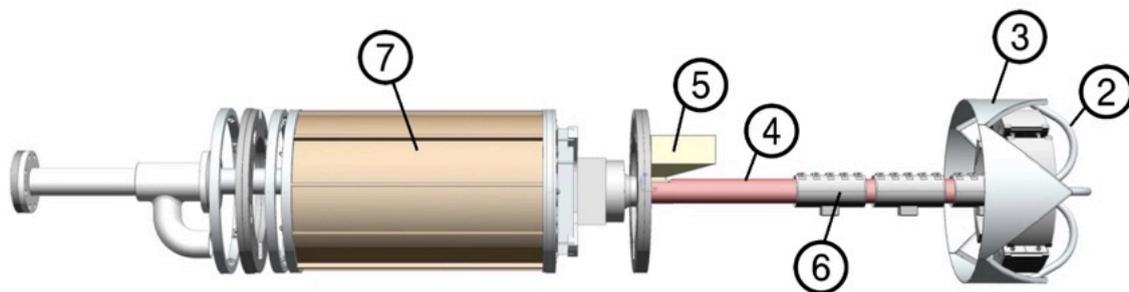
Swissloop Tunnelings Tunnel Lining System (cutaway view)
